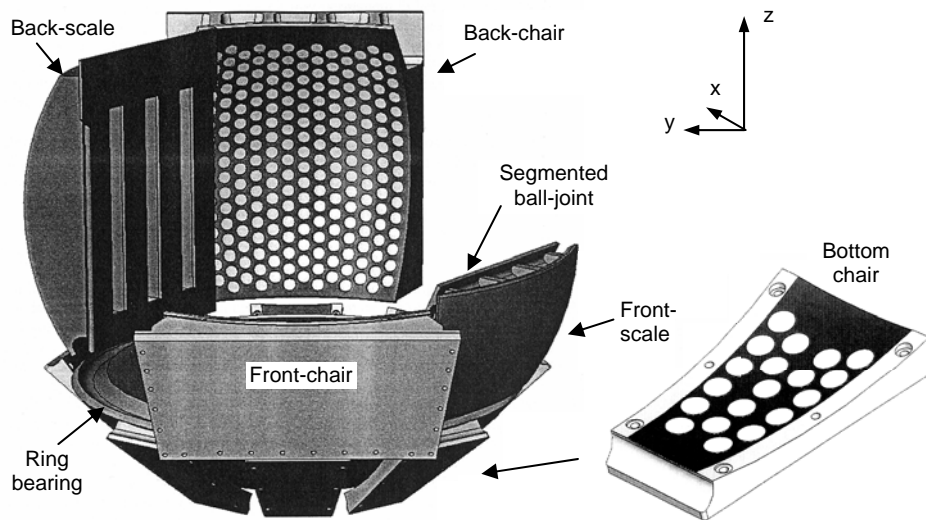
Ball-joint in the Maeslant storm surge barrier, modified with holes for containing hybrid UHMWPE polymer pads as bearing elements
